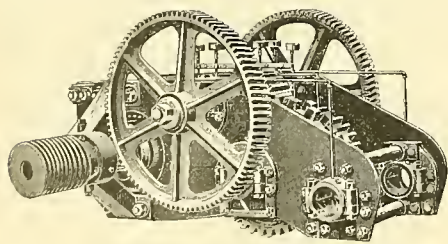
MOTOR OF MONT SALEVE RAILWAY.
